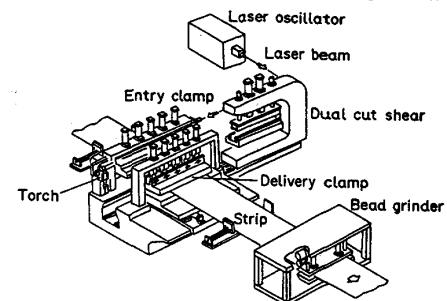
Schematic diagram of laser welder and bead grinder
